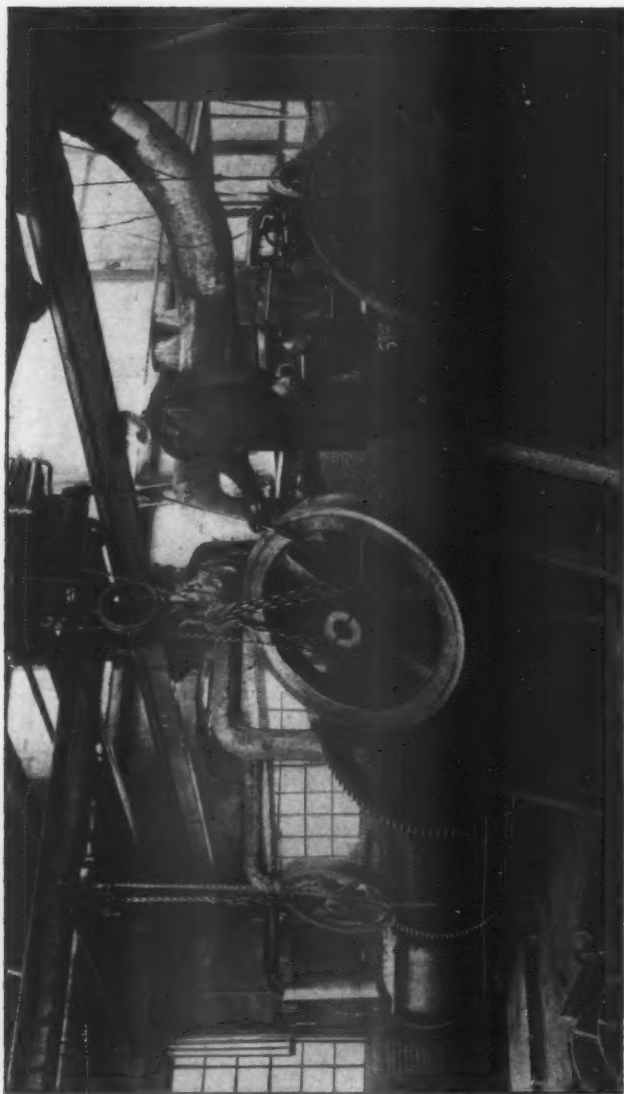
LARGE TUMBLING MILLS FOR HANDLING HEAVY GRAY IRON CASTINGS
